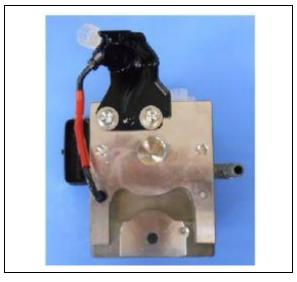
Brake Actuator Tube No. 3 and Brake Actuator Way in the Form of Assembly
